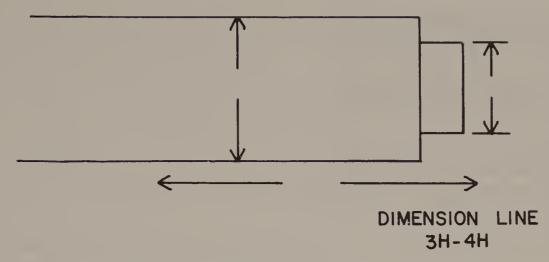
The dimension line is broken in the middle for the dimension.
